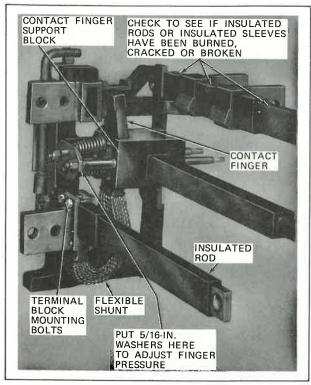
LOWER END FRAME AND PARTIAL ASSEMBLY OF CONTACT AND SUPPORT PARTS.
